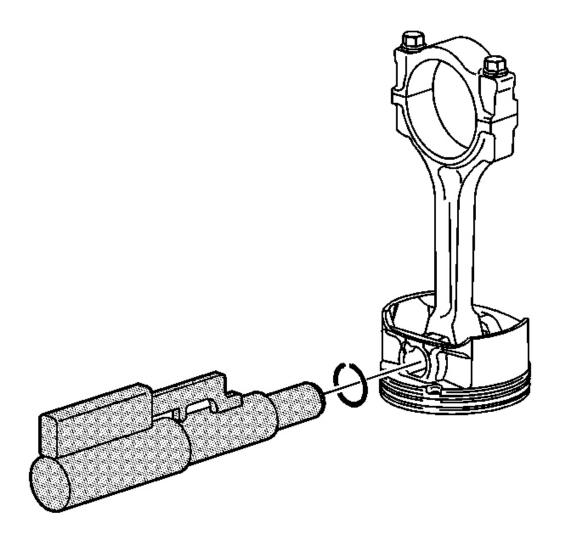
View Of Piston Pin Retaining Clips Courtesy of GENERAL MOTORS CORP.
